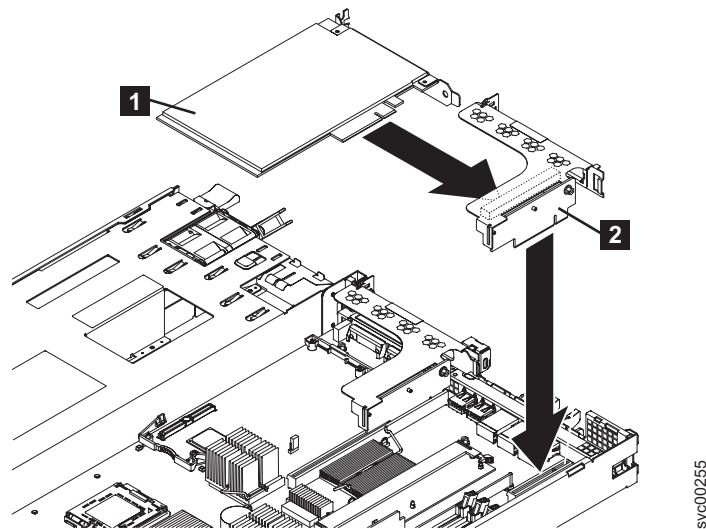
Removing the riser-card assembly from the SAN Volume Controller 2145-8G4
